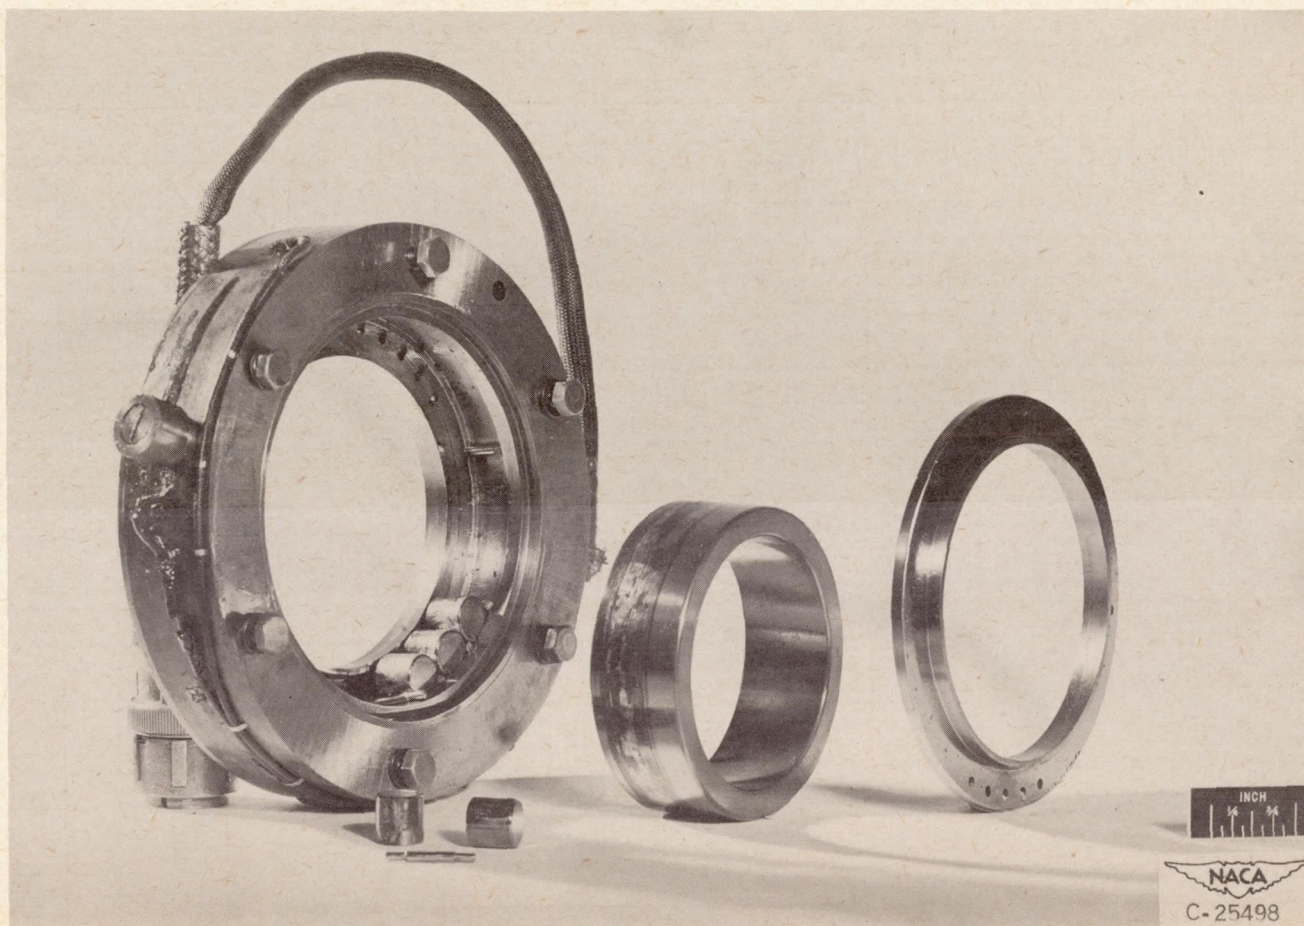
Special cageless roller bearing after test (bearing 5a).
